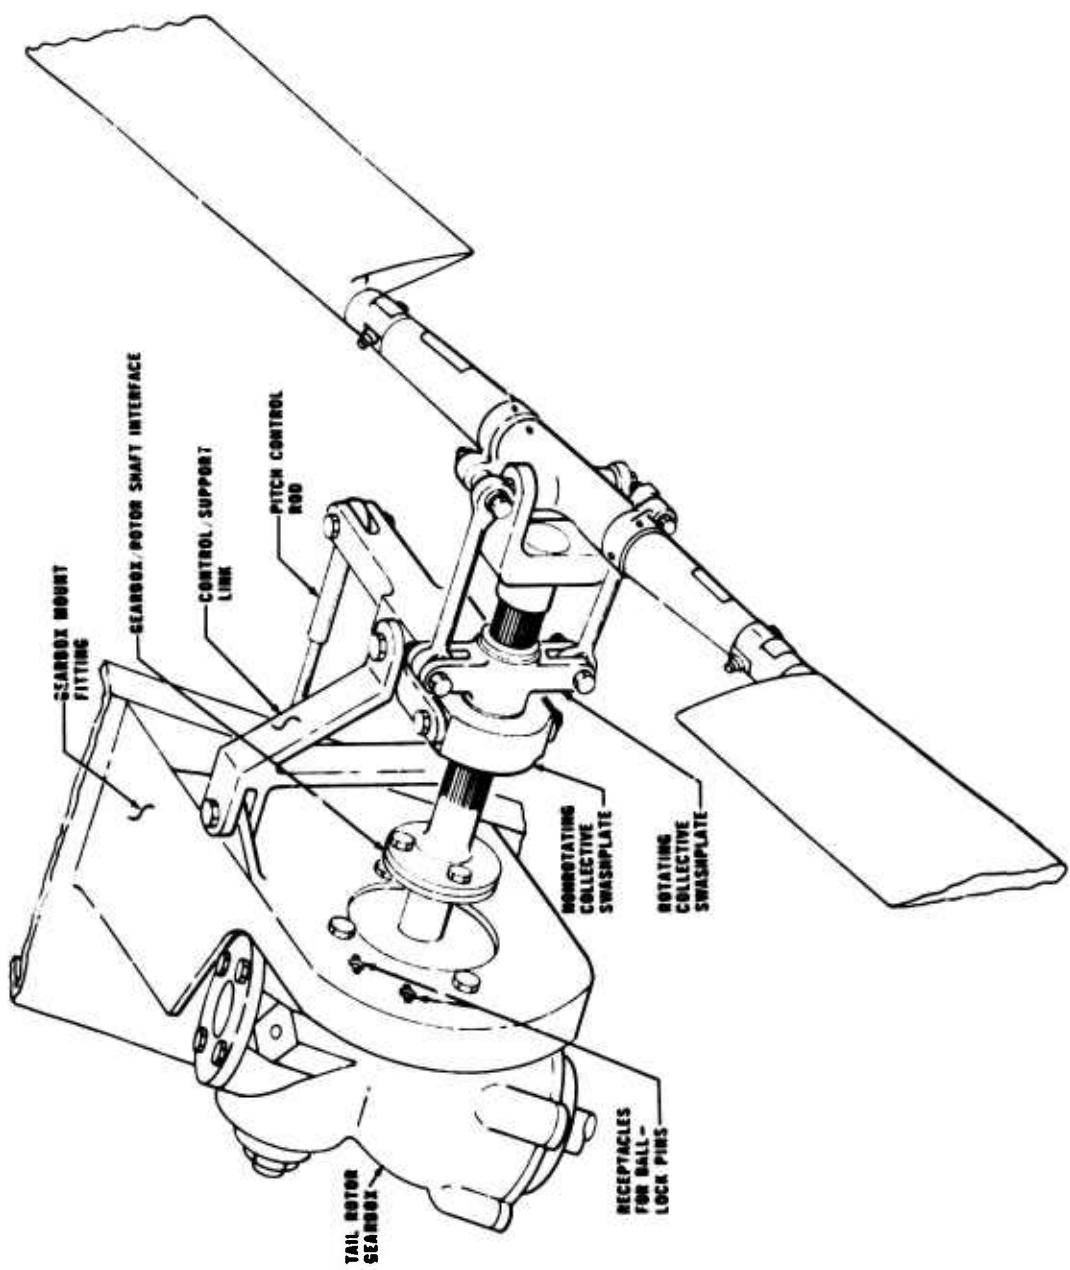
Tail Rotor Gearbox With Sectionalized Output Shaft and Stowable Tail Rotor.
